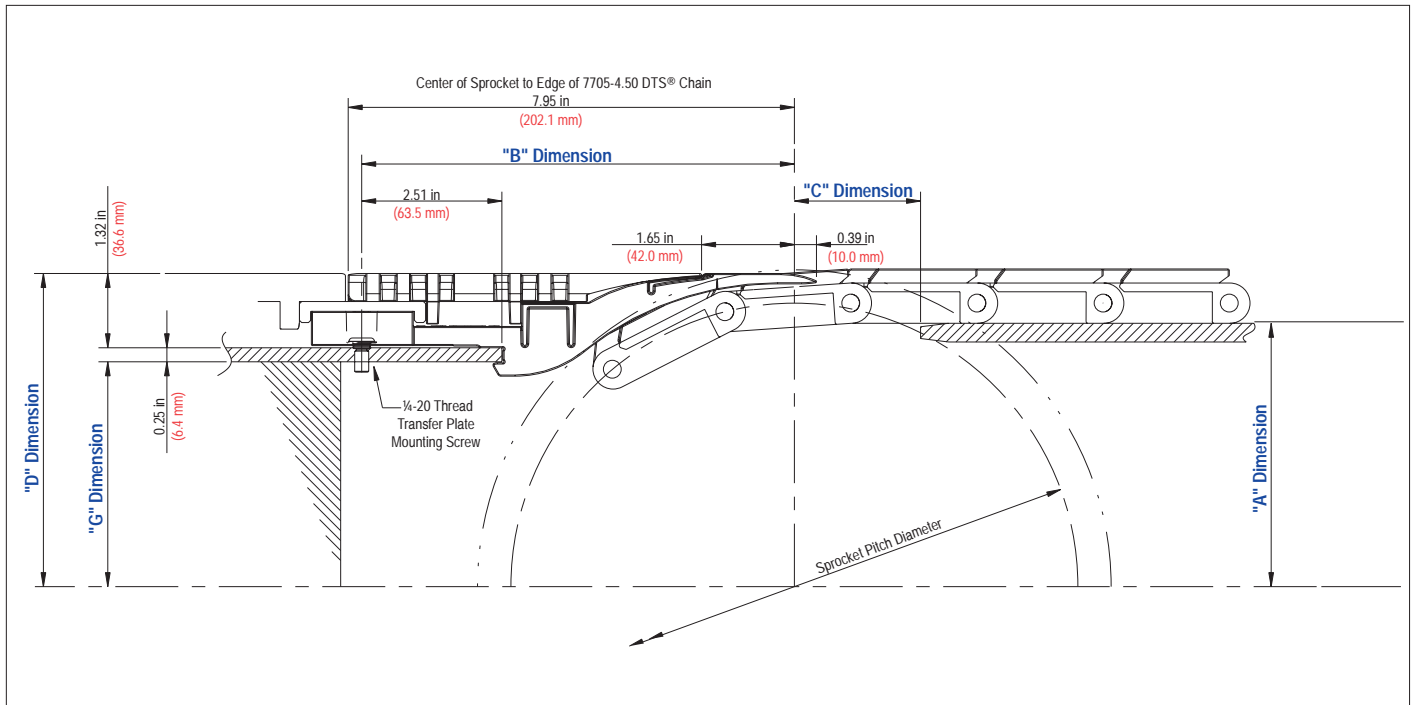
DTS®-C 4707/5997 - 7705DTS Shaft Drop Drawing
